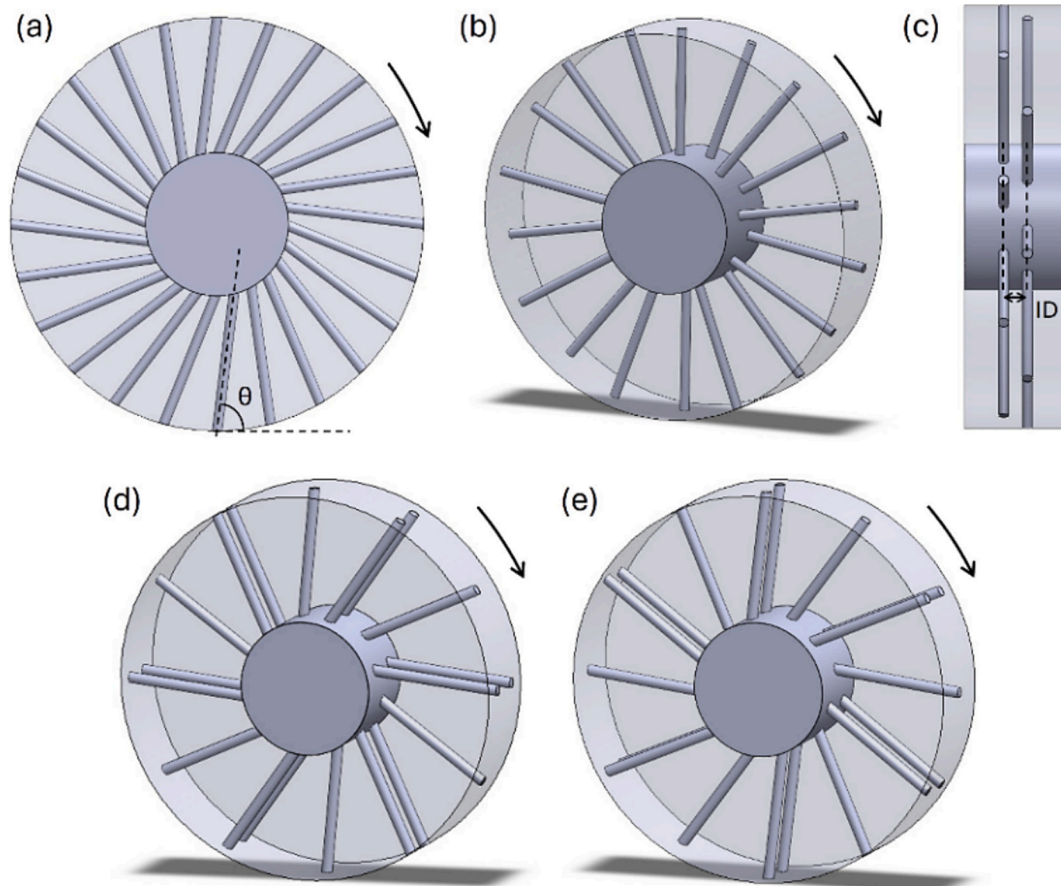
Front view of a single-layer grinding wheel with channels inclined at an angle θ relative to the workpiece surface (a), structured grinding wheels with two layers of channels (b), side view showing the interlayer distance (ID) (c), and three-layer configurations in two scenarios: one channel in contact with the workpiece (d) and two channels in contact with the workpiece (e).
